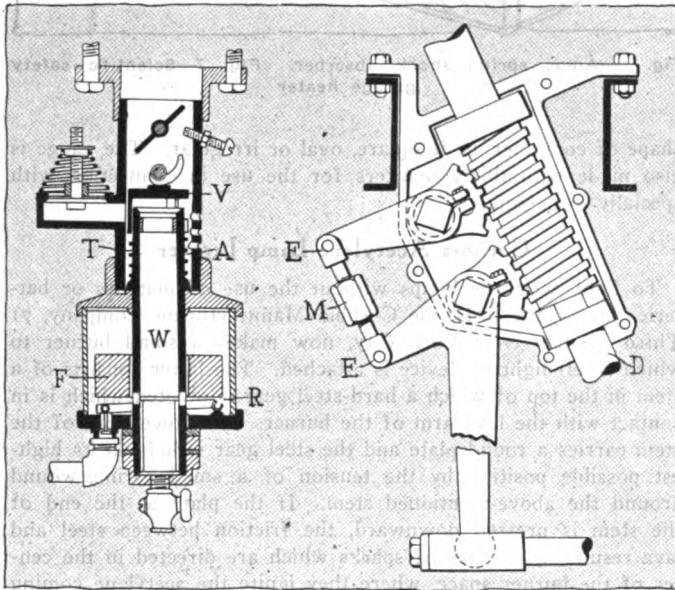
Morris-Merritt wick-feed carbureter. Fig. 2—Moore steering gear
